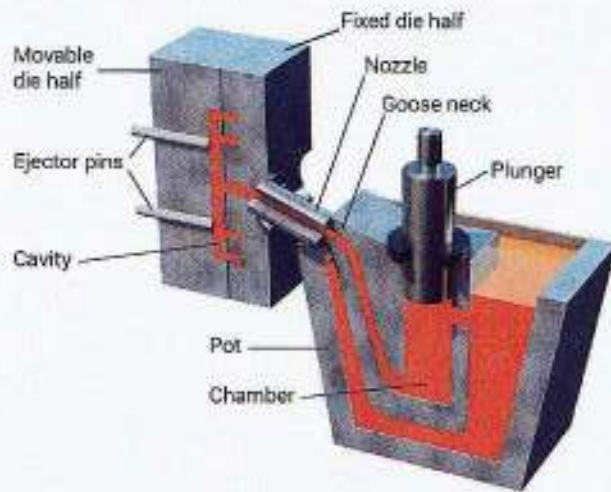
Pressure Die Casting (Image Courtesy: engineeringclicks.com)
